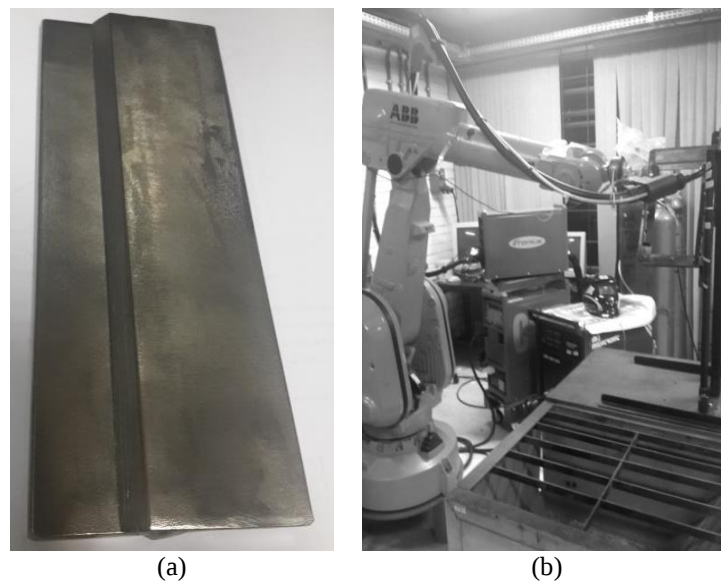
(a) Welding joint, (b) Photograph of welding experiment
